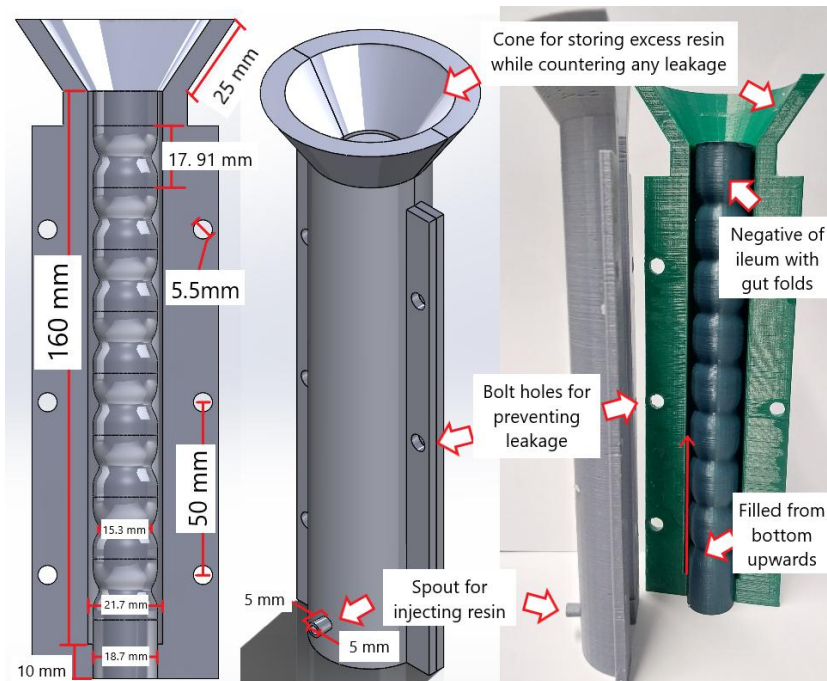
The dimensions and construction of the synthetic intestine mould.
